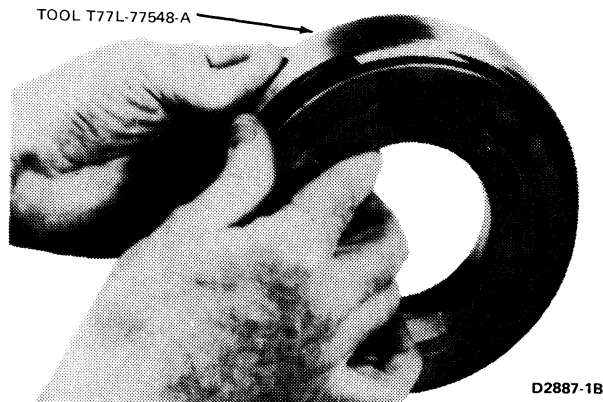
Installing Forward Clutch Piston and Lip Seal
